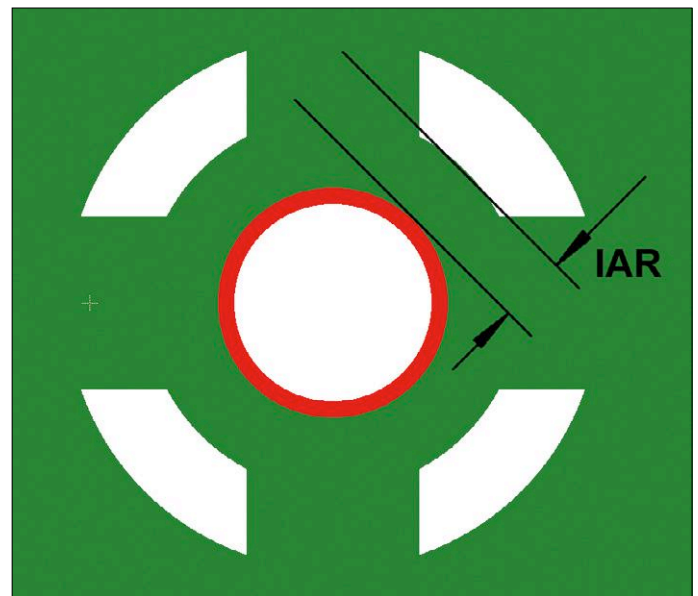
Heat relief prevents too much heat flowing away into the large copper pour during soldering. Here the minimum inner annular ring (IAR) may be specified even though it is much the same as the OAR. The red ring represents the plating of the hole.
